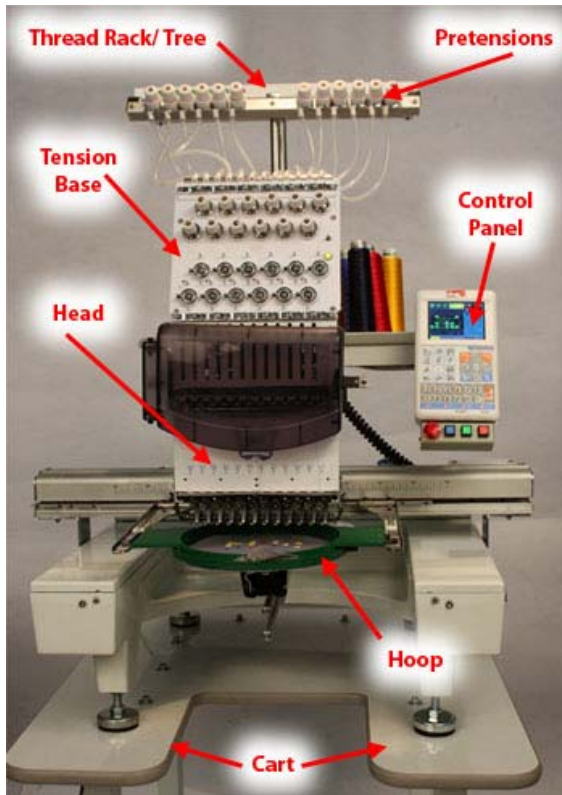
A – Butterfly B1201B/T Embroidery Machine – Single head 12 needle embroidery machine. The machine assembled on the cart/stand. This example is with the tubular hoop attachment installed and the removable table removed.
